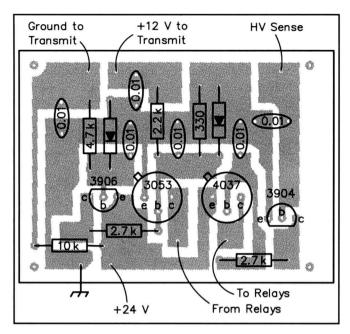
TR switching PC board, component side. While board layout is not especially critical, the board itself must be 1.75 X 3.25 in. or smaller in size.
